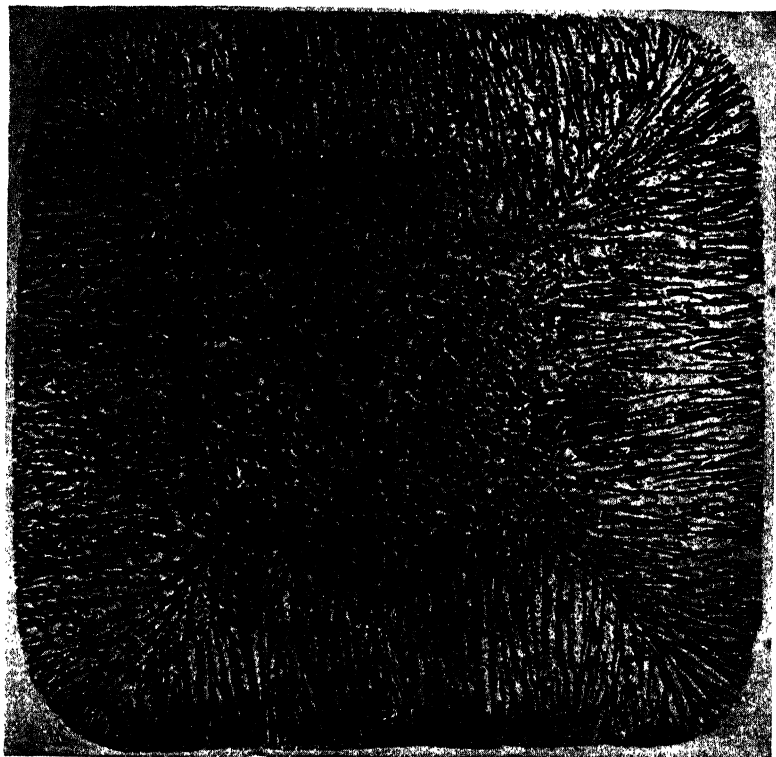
VII.—Horizontal fracture of a steel ingot showing dendritic structure. Note the central pipe. (Courtesy of The Gathmann Engineering Co.)
